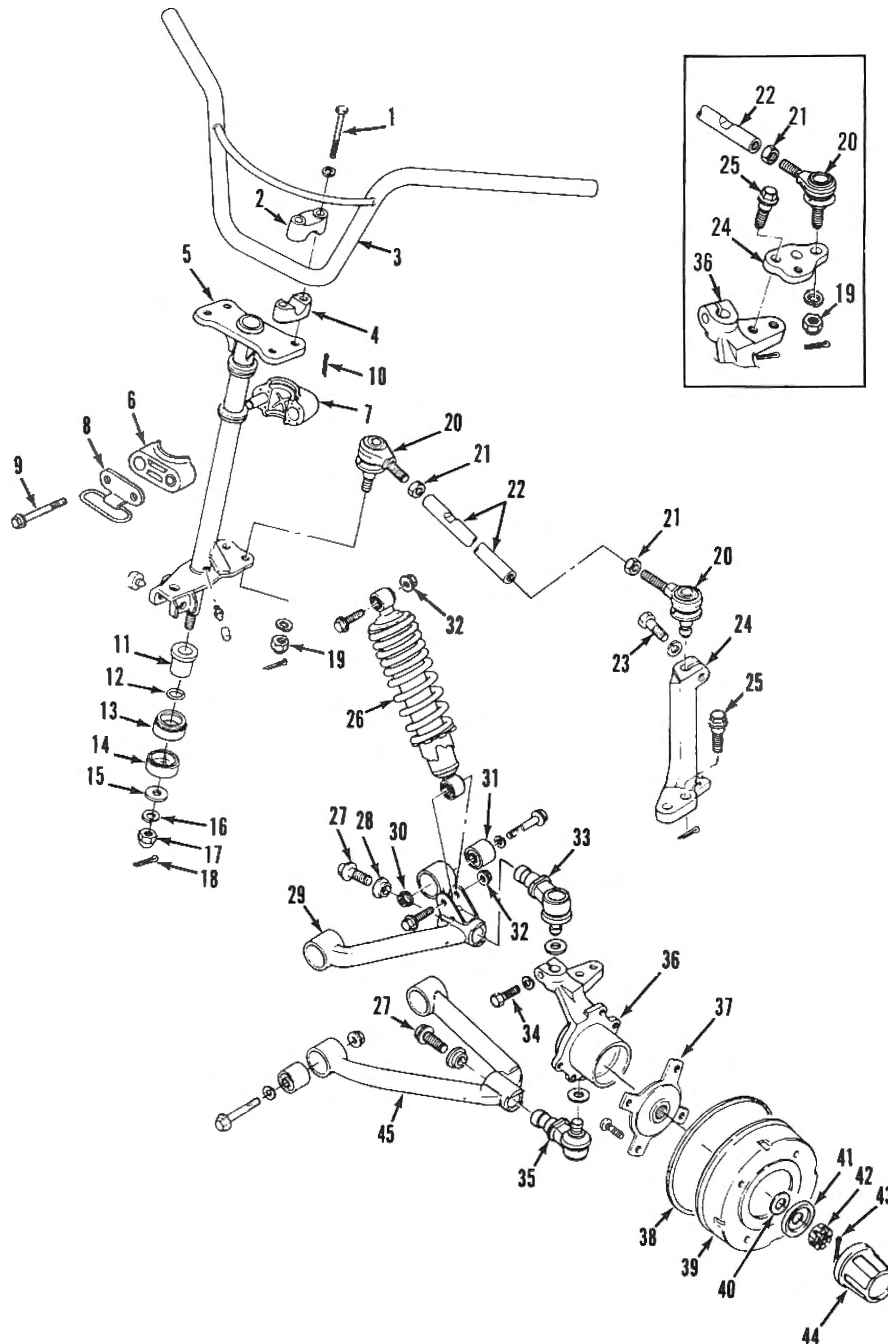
Exploded view of steering and front suspension assembly. Components in box are used on LT-F250 models.
